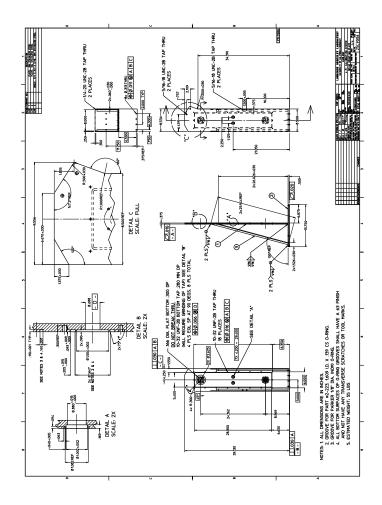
Technical drawing of the mounting plate for the motor winch system.
